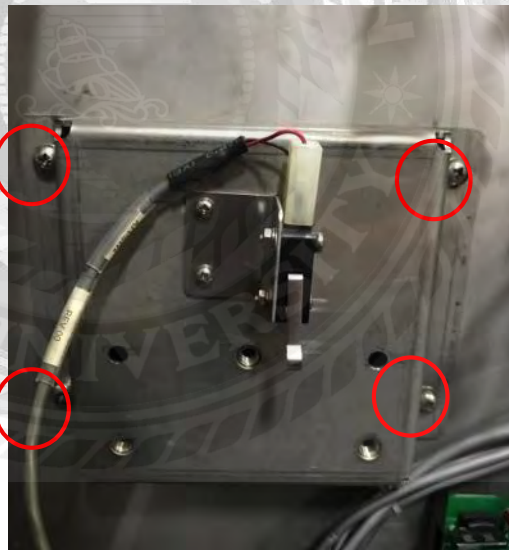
Stacker Mounting Bracket and the Locations of the Screws
